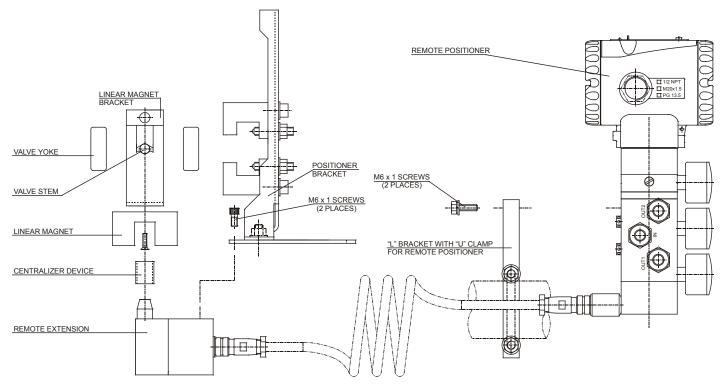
Positioner in Linear Actuator with Remote Position Sensor
